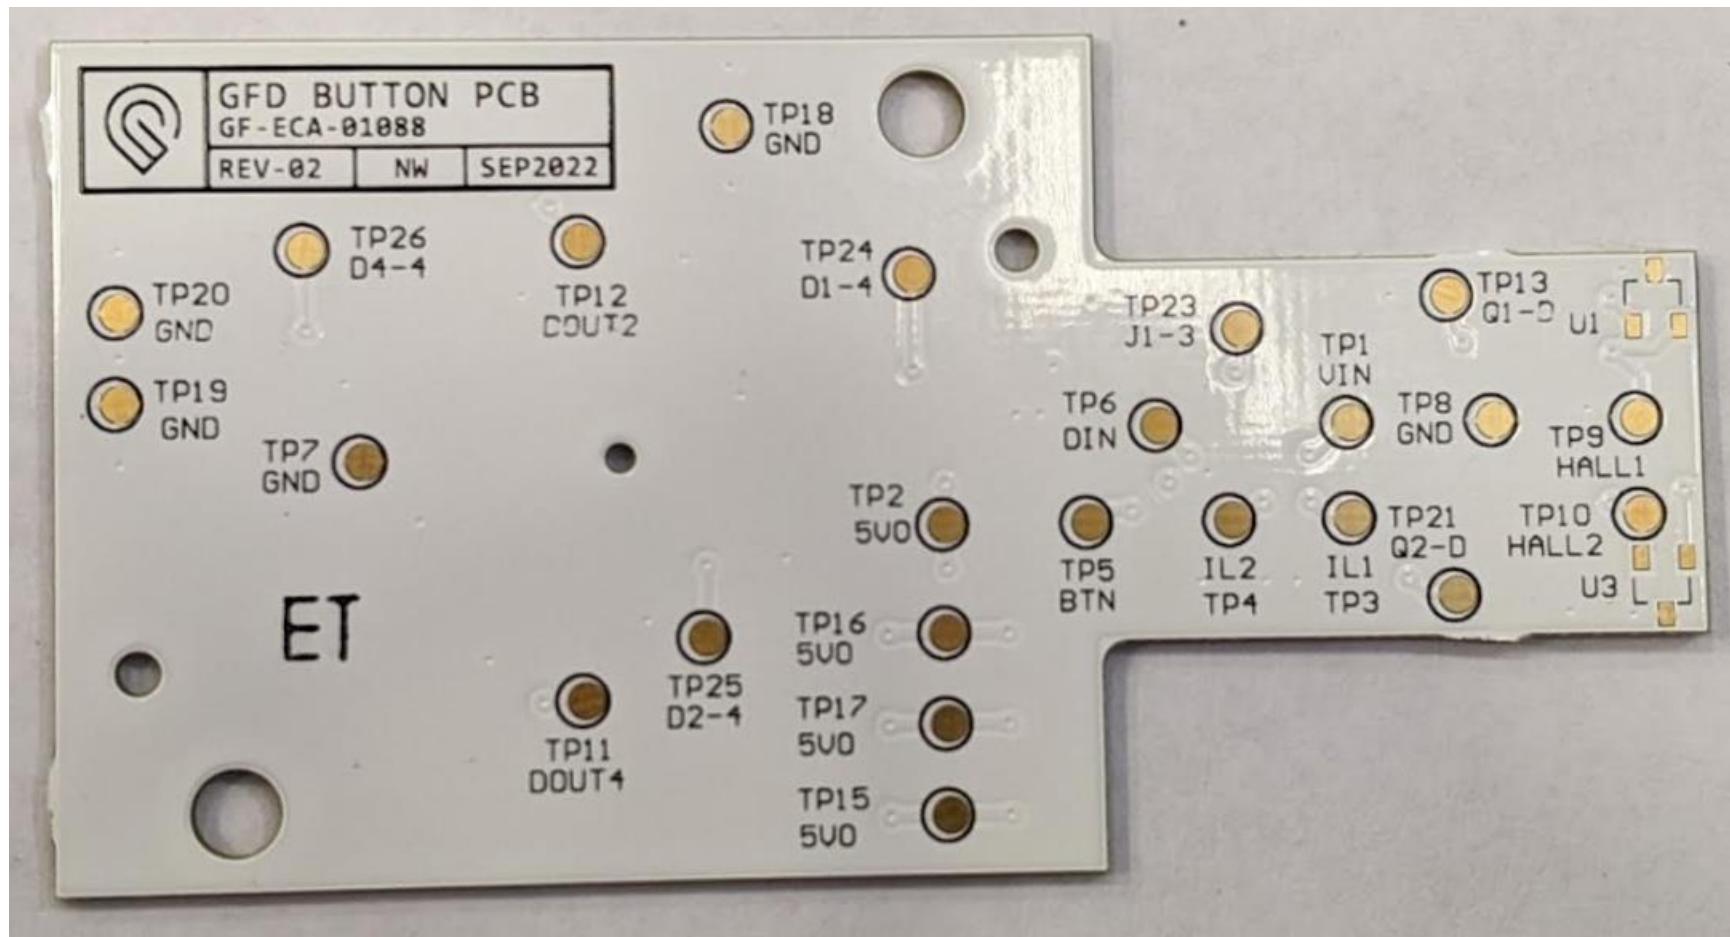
GF-PCA-00154-Lid PCBA- Bottom Side
